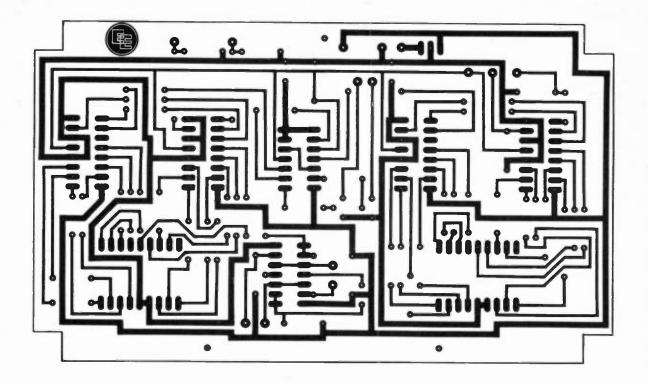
Full size printed circuit board artwork and component layout for the Lap Counter and Judge.
